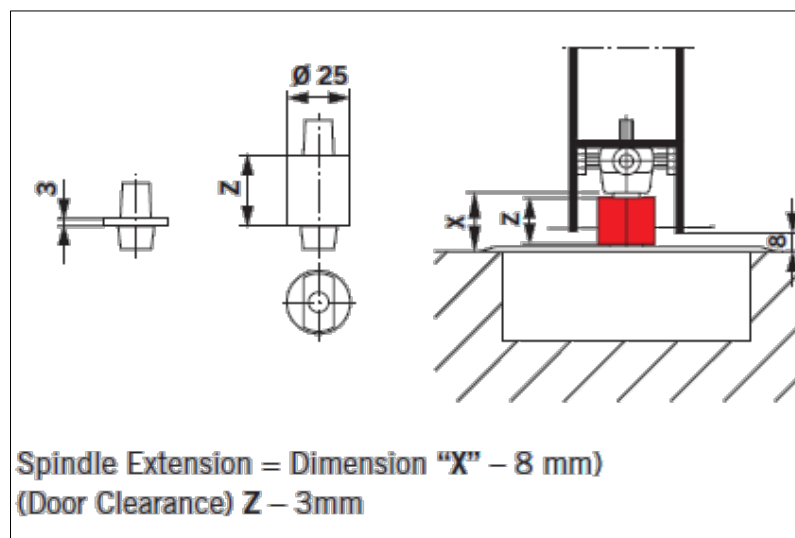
TYPICAL SKETCH OF 3 SPINDLE FOR FLOOR SPRING
